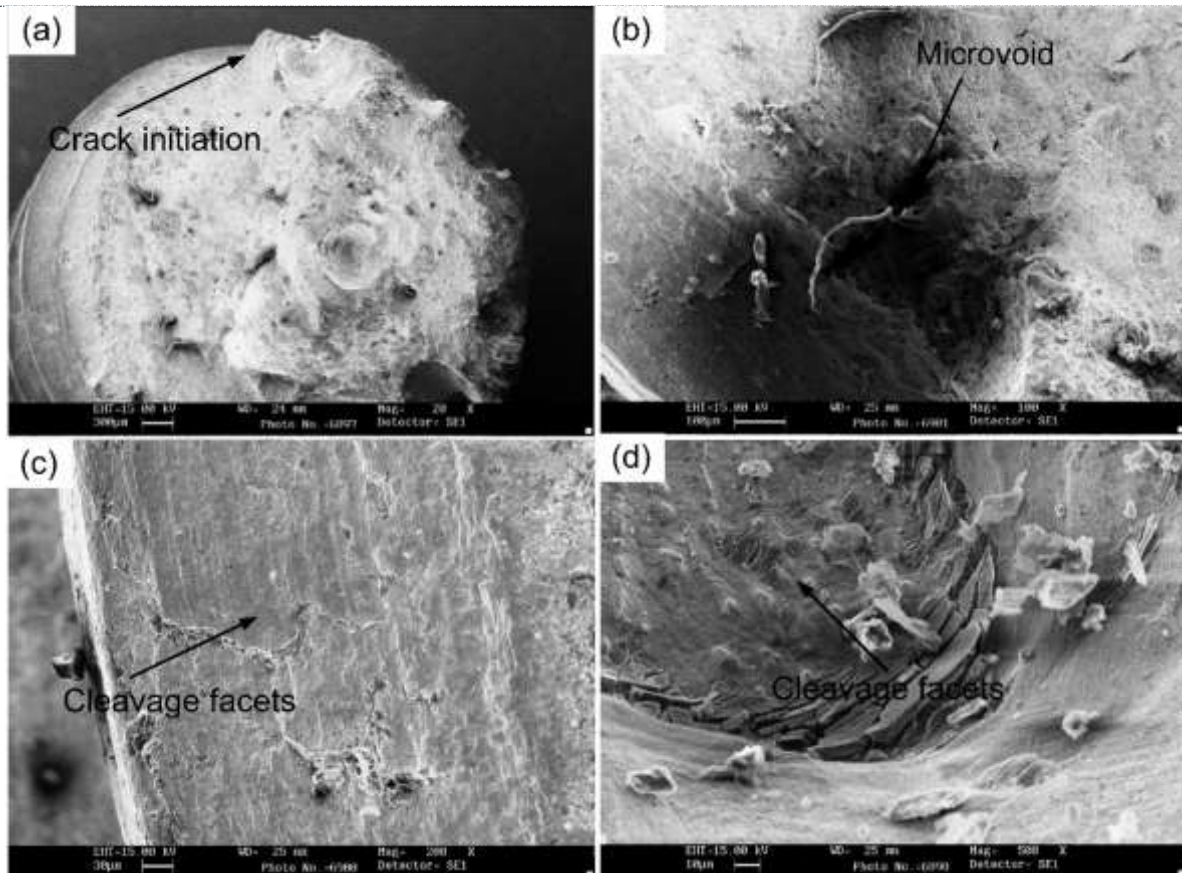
Fracture morphology of AISI 304 implant specimen; (a) General fracture appearance of top view, (b) cleavage facets, (c), (d) Final fracture appearance
